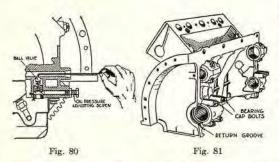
Oldsmobile (eight-cylinder, V-type engine) oilpressure regulator.
